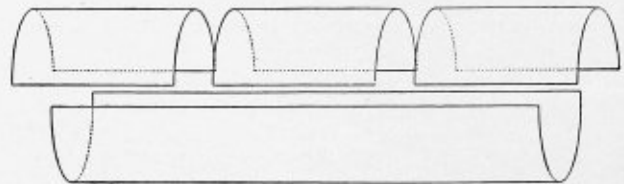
SINGLE BOTTOM SHEET SHELL.
